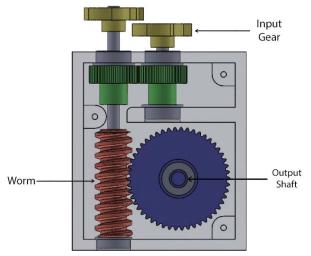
A front view of a prototype module showing the input gears, gear train, and output shaft. This module is used to convert the rotation of a motor into rotation in the output shaft.
